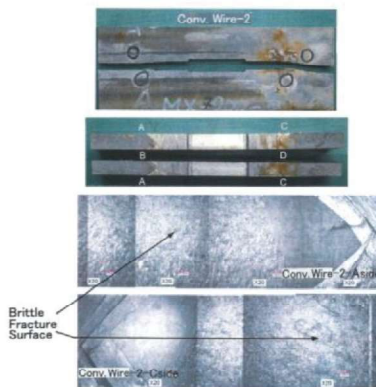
Fracture surface and pass after fracture toughness test [Conv. Wire, -144°C , $K_{Ic} : 1.50 \times 10^3 \text{ N}/\text{mm}^{3/2}$]
